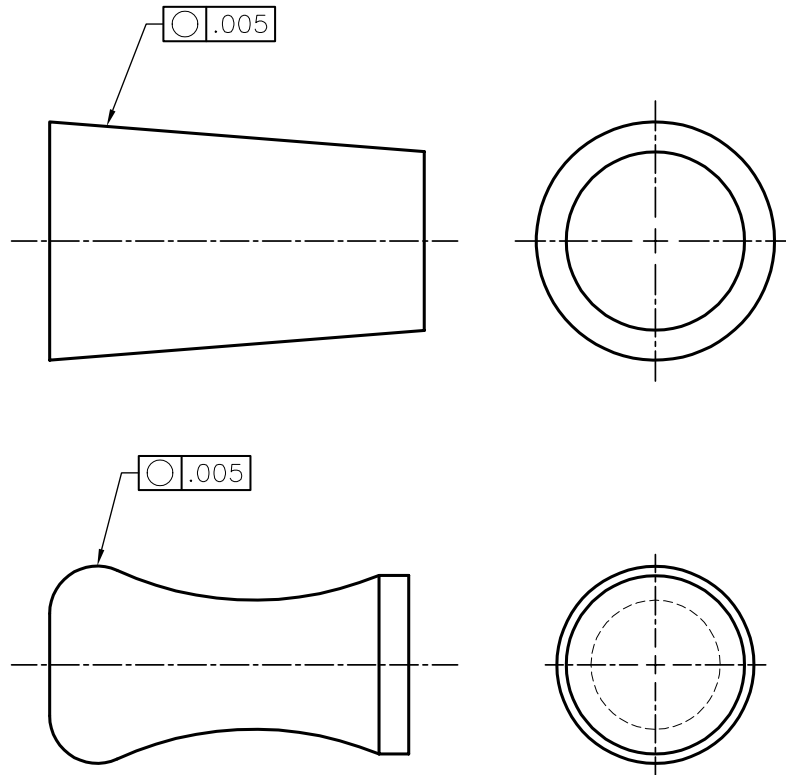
Circularity tolerance applied to non cylindrical feature
